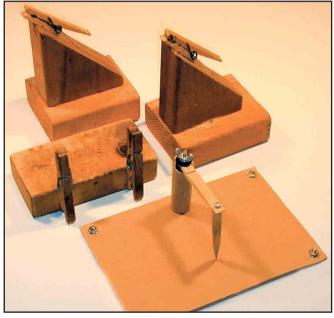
These handy homemade gadgets make working on cables and surface-mount parts a lot easier. Wooden materials won't melt or gouge. And, if charred or damaged, they're easy to replace.
